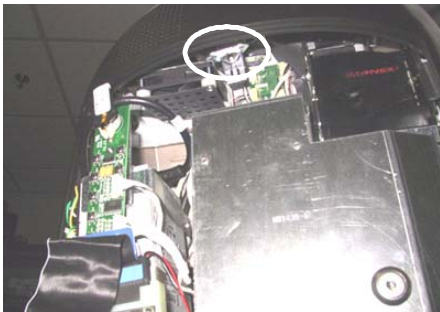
ROTARY DRAW LATCH INSIDE TOP COVER FIGURE 2 - SCREW IN CENTER OF BOTTOM COVER
